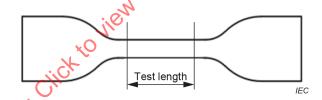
Shape of dumb-bell test specimen (ISO 37:2017)
